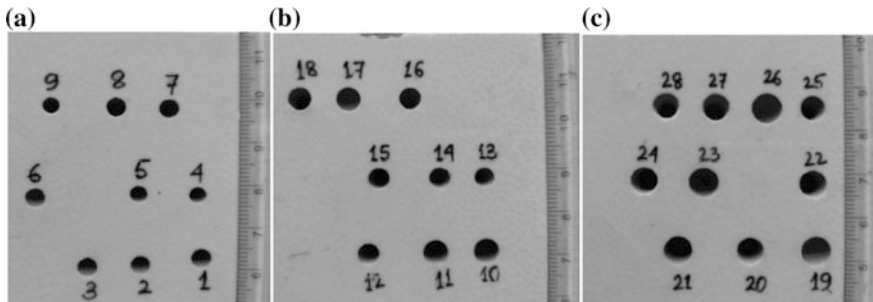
(a–c) Photographs of the machined hole (using SiC) on tiles
